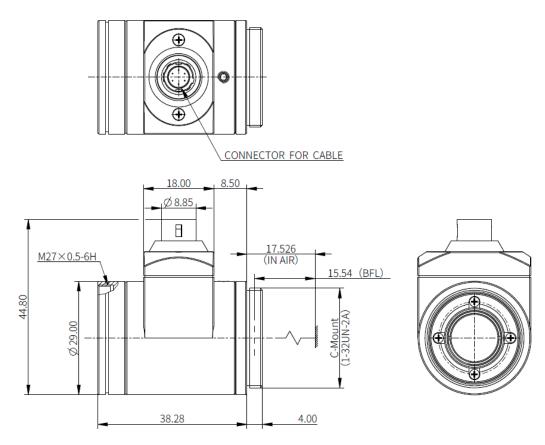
Mechanical drawing of the ELM-35-6.4-11-C
